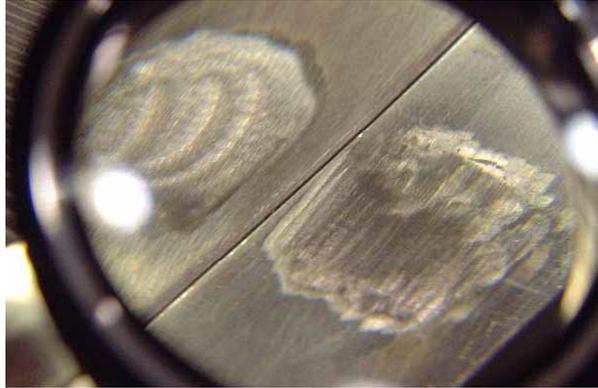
SURFACE APPEARANCE OF IN-718 SAMPLES AFTER BLENDING PROCESS
